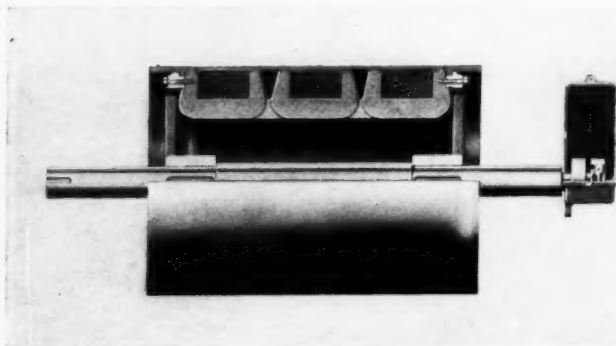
Cutaway view to show construction of coils in the interior of a magnetic conveyor roll
